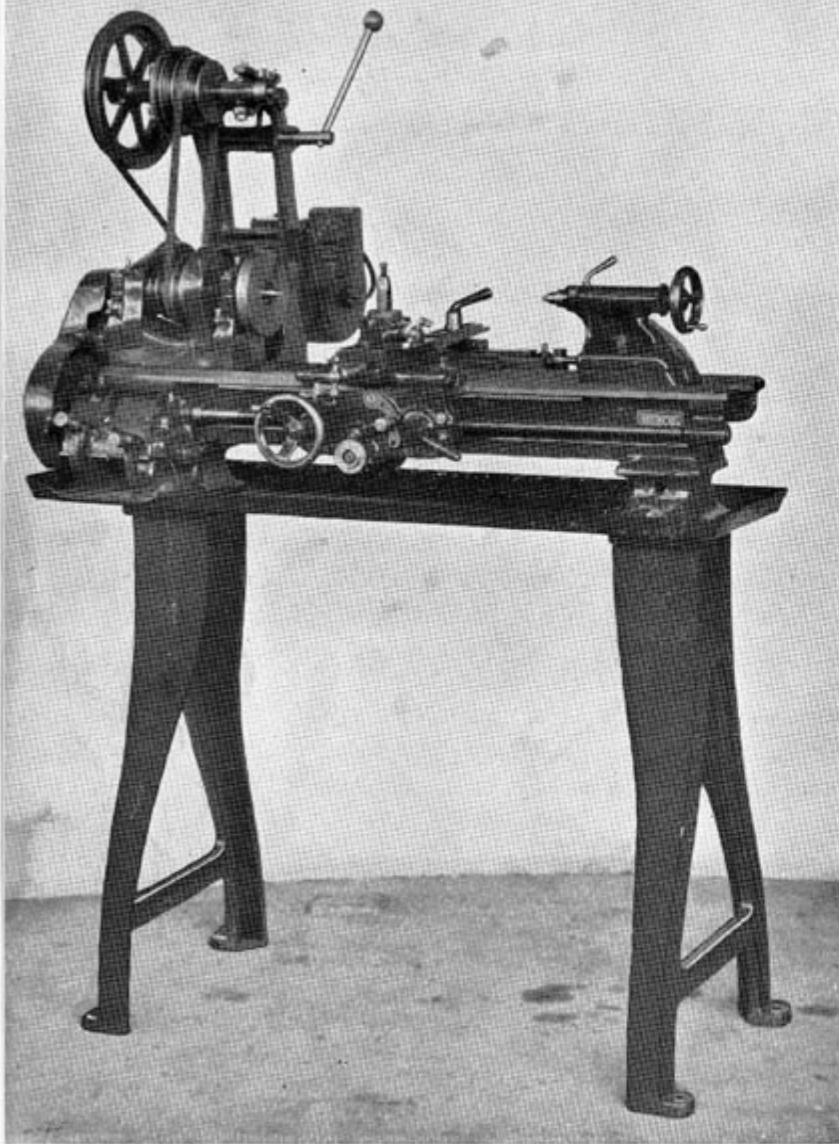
MODEL A LATHE ON LEGS WITH TRAY.
